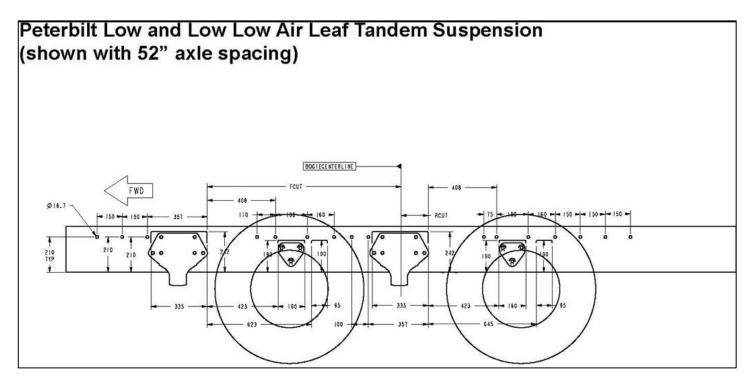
Peterbilt Low and Low-Low Air Leaf Tandem Frame Drilling (Dimensions In Millimeters)
